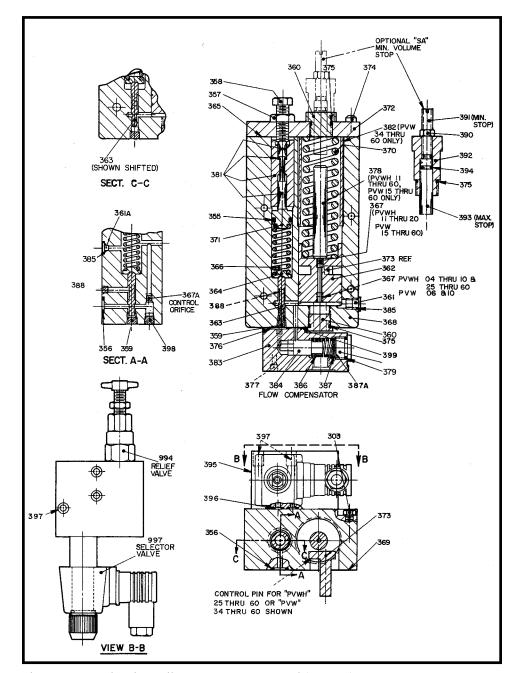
Parts drawing, Oilgear Type "2F" Control (E51215).
